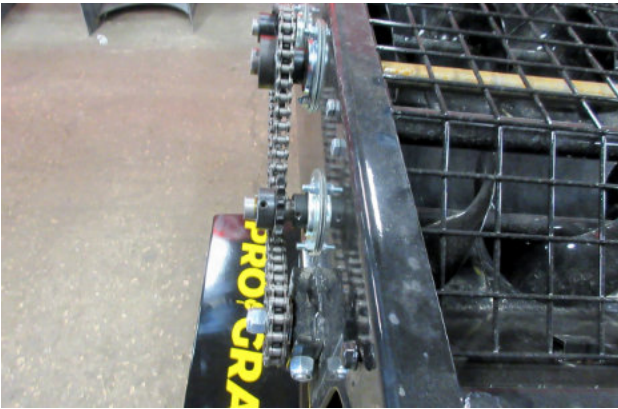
HOPPER CHAIN DRIVE SYSTEM
